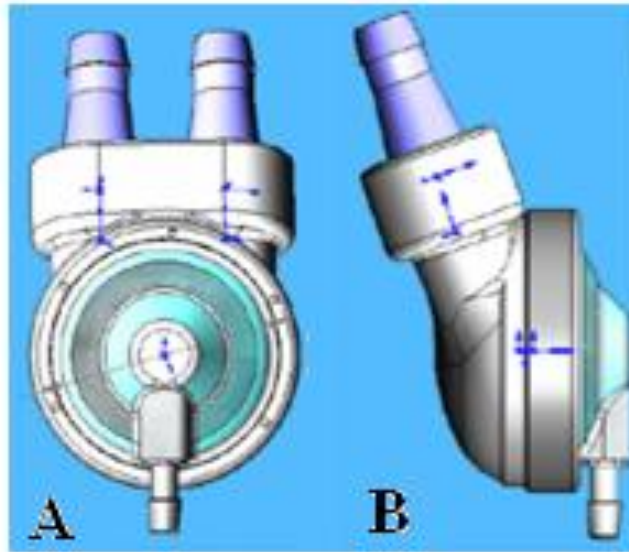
Solidworks Drawing of the PVAD Model Covering. (A) Back View (B) Side View
